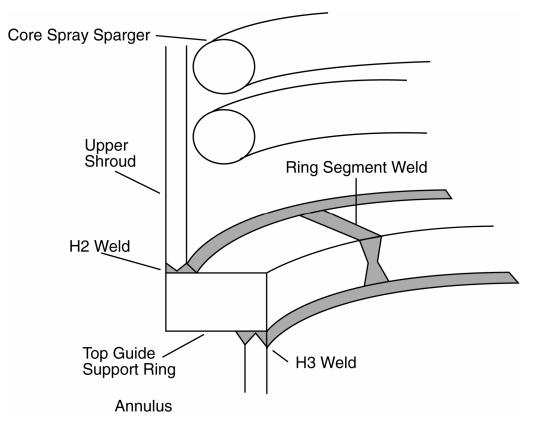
Shroud Ring Segment Weld
